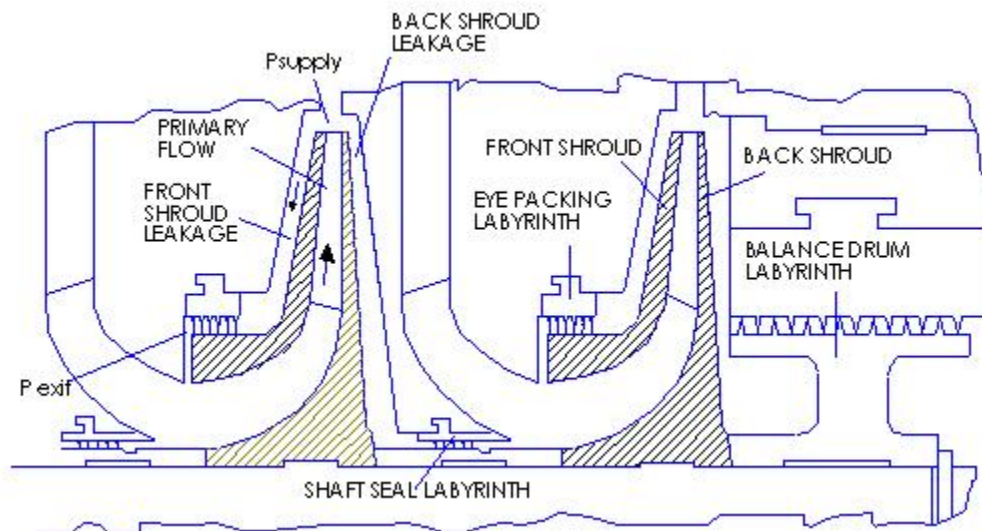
Schematic of the centrifugal impeller with seals [2]
